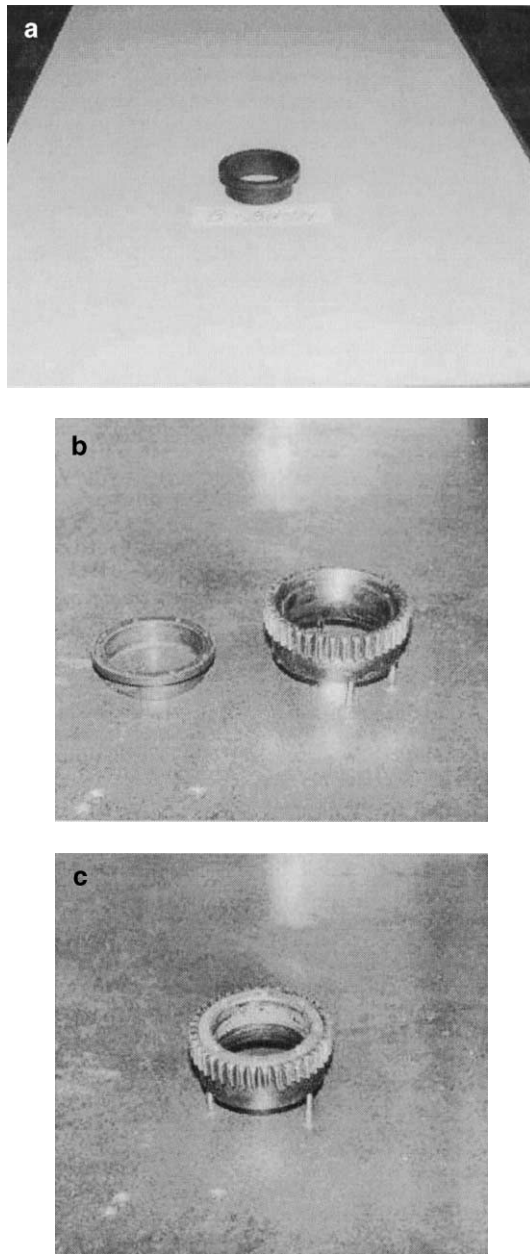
B-bushing. (A) B-bushing. (B) B-bushing disassembled from gear pump. (C) Assembled gear pump including B-bushing.
